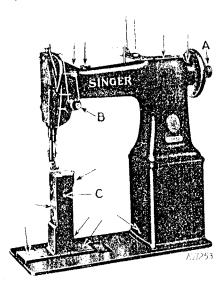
Oiling Points at Front of Machine, also Adjustments on the Machine
